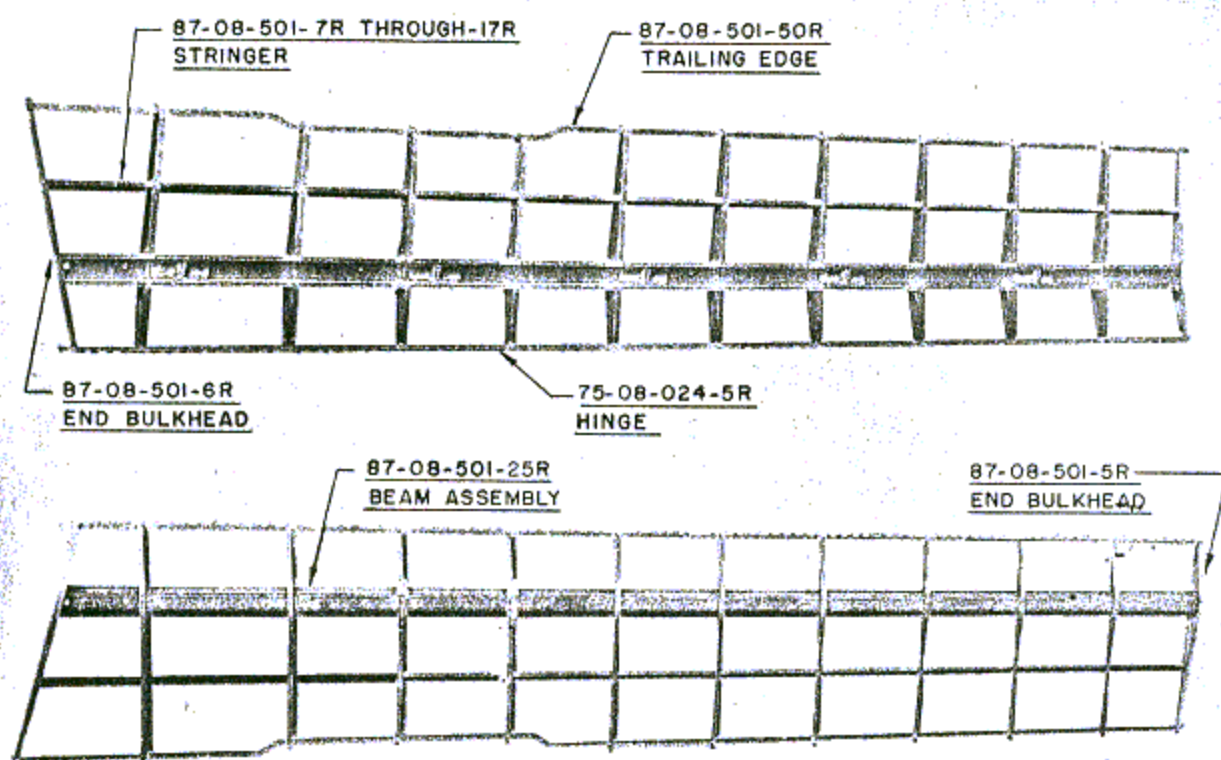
Right-Hand Wing Flap Skeleton—Top and Bottom Views
